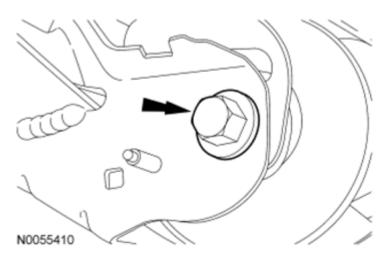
Locating Transaxle Bracket Bolts Courtesy of FORD MOTOR CO.
